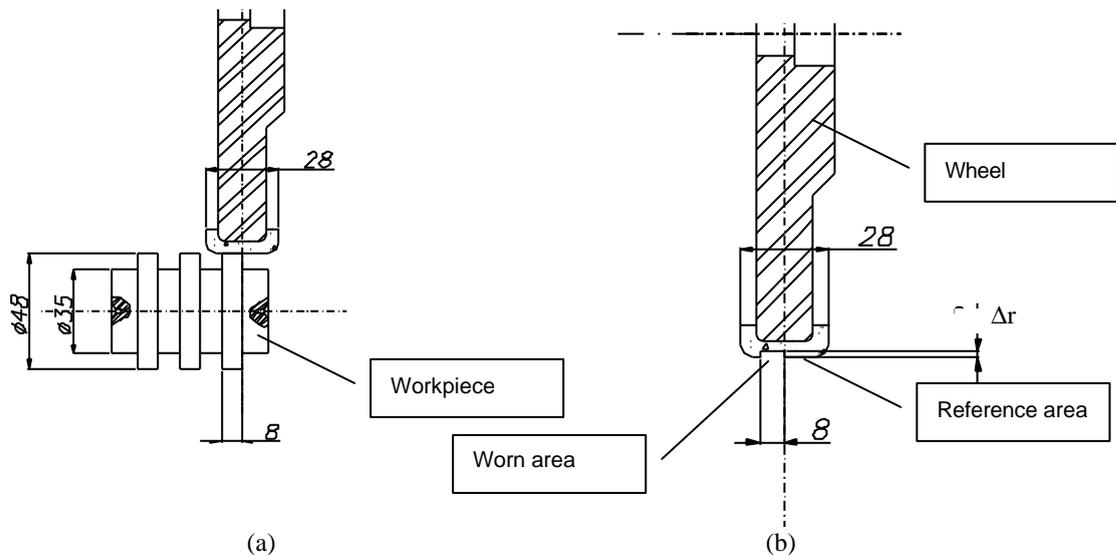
(a) Positioning of the workpiece and (b) wheel wear area.
